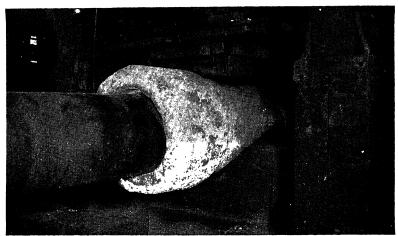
Forging boiler drum. The mandrel is the large cylinder coming from the left. (Bethlehem Steel Co.)
